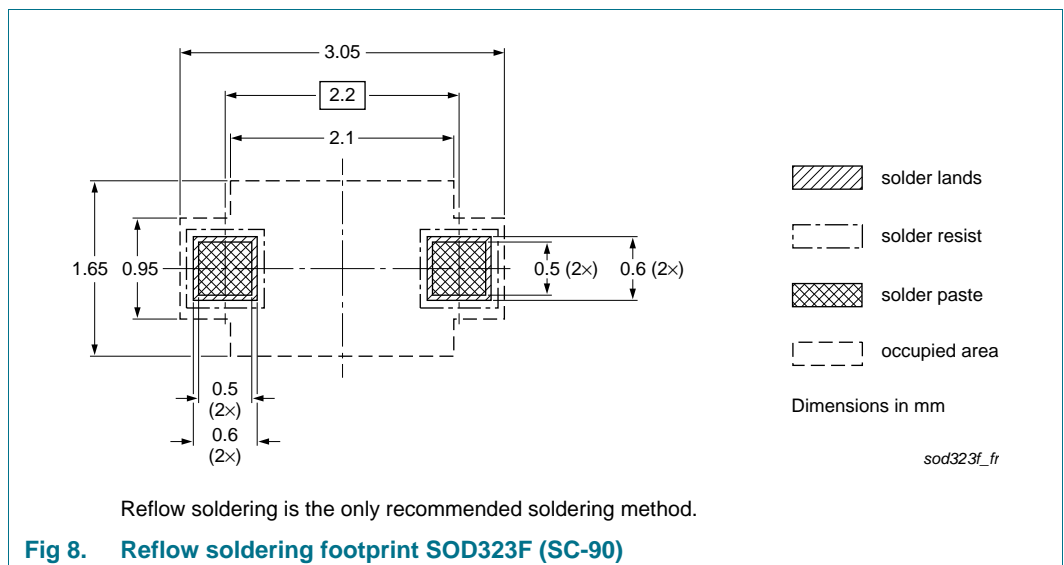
Reflow soldering footprint SOD323F (SC-90)
